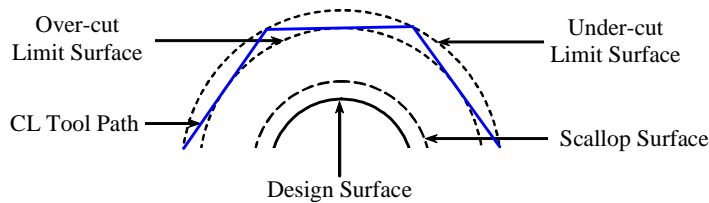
CL tool path conforming to the specified tolerance limits.
